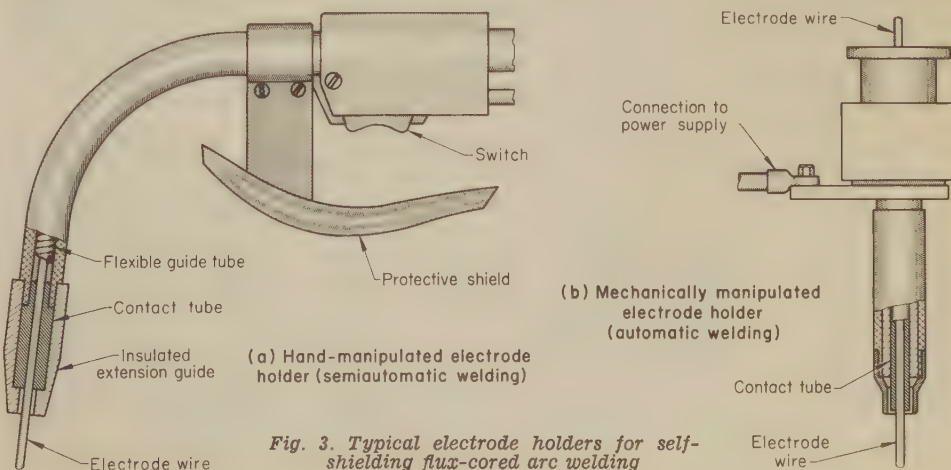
Typical electrode holders for self-shielding flux-cored arc welding
